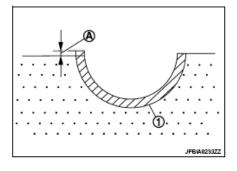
Identifying Main Bearing Crush Height Courtesy of NISSAN MOTOR CO., U.S.A.
